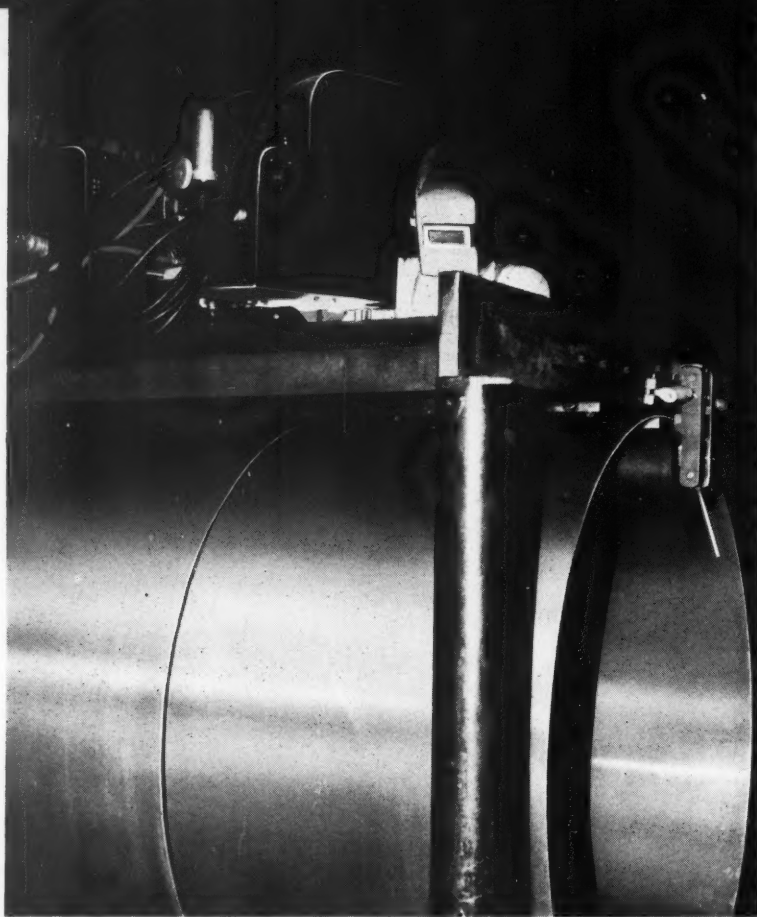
Longitudinal seams connecting the individual tank sections are fusion-welded on automatic Heliarc welding machines.
